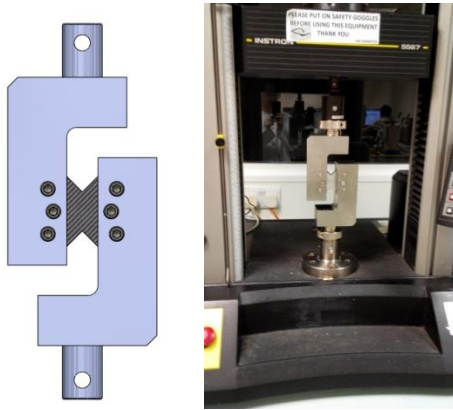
Assembled view of fixture and sample (left) and fixture in experimentation (right).
